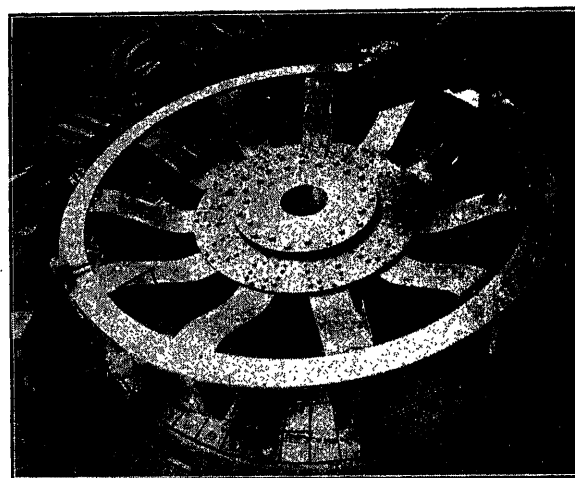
ROTOR SPIDER IN AN INVERTED POSITION IN THE PROCESS OF MACHINING THE SEGMENTAL BRAKING PLATES
